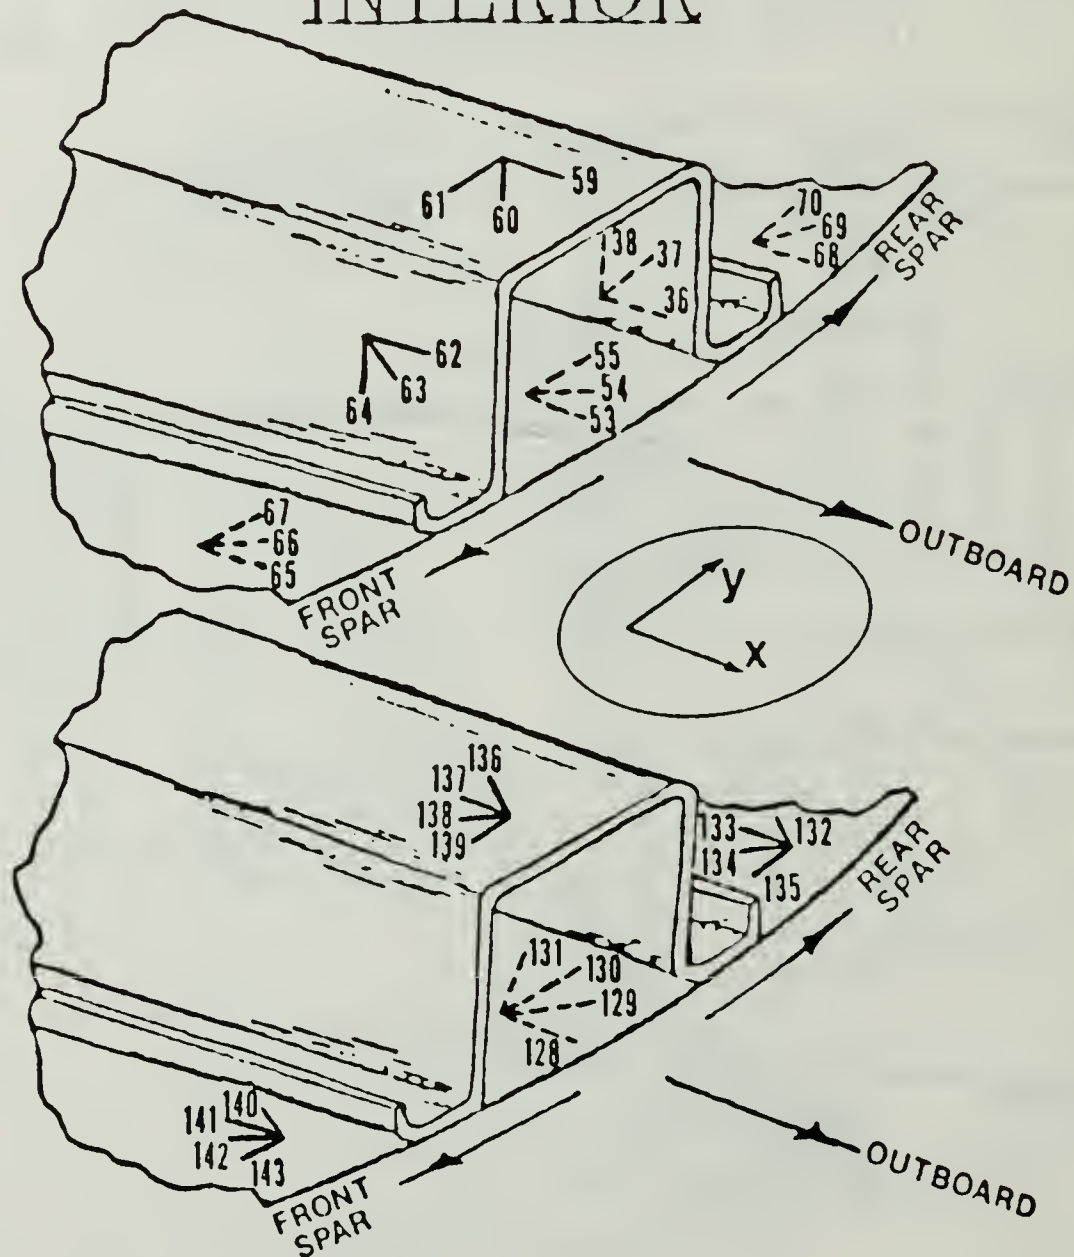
A P2V Starboard Wing Strain Gage Locations,
